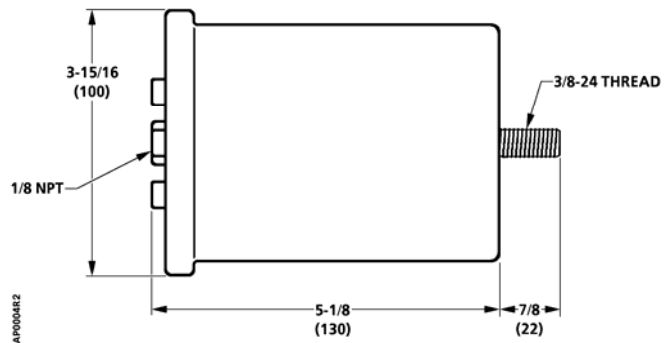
No. 3 Pneumatic Damper Actuator Dimensions. Dimensions are in Inches (Millimeters).
